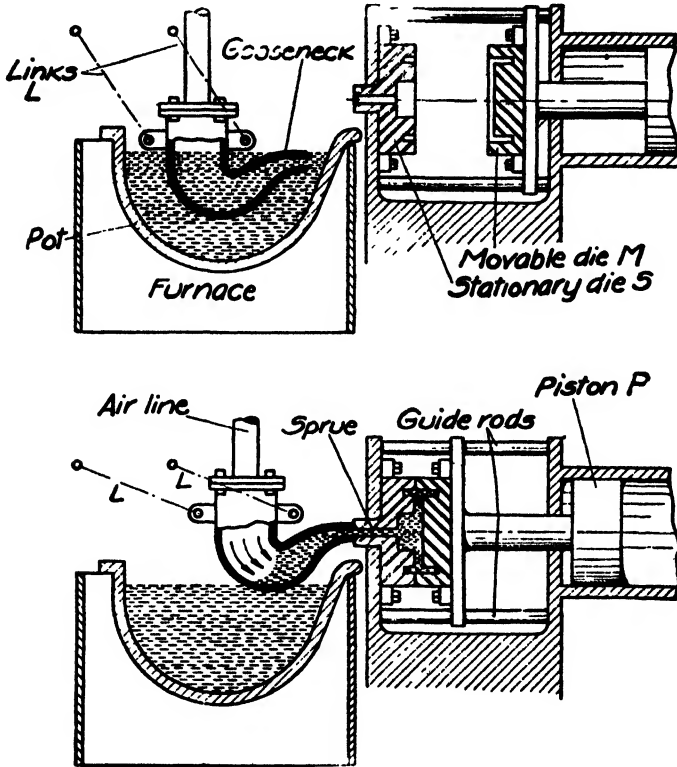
Operation of Air-operated Die-casting Machine.
